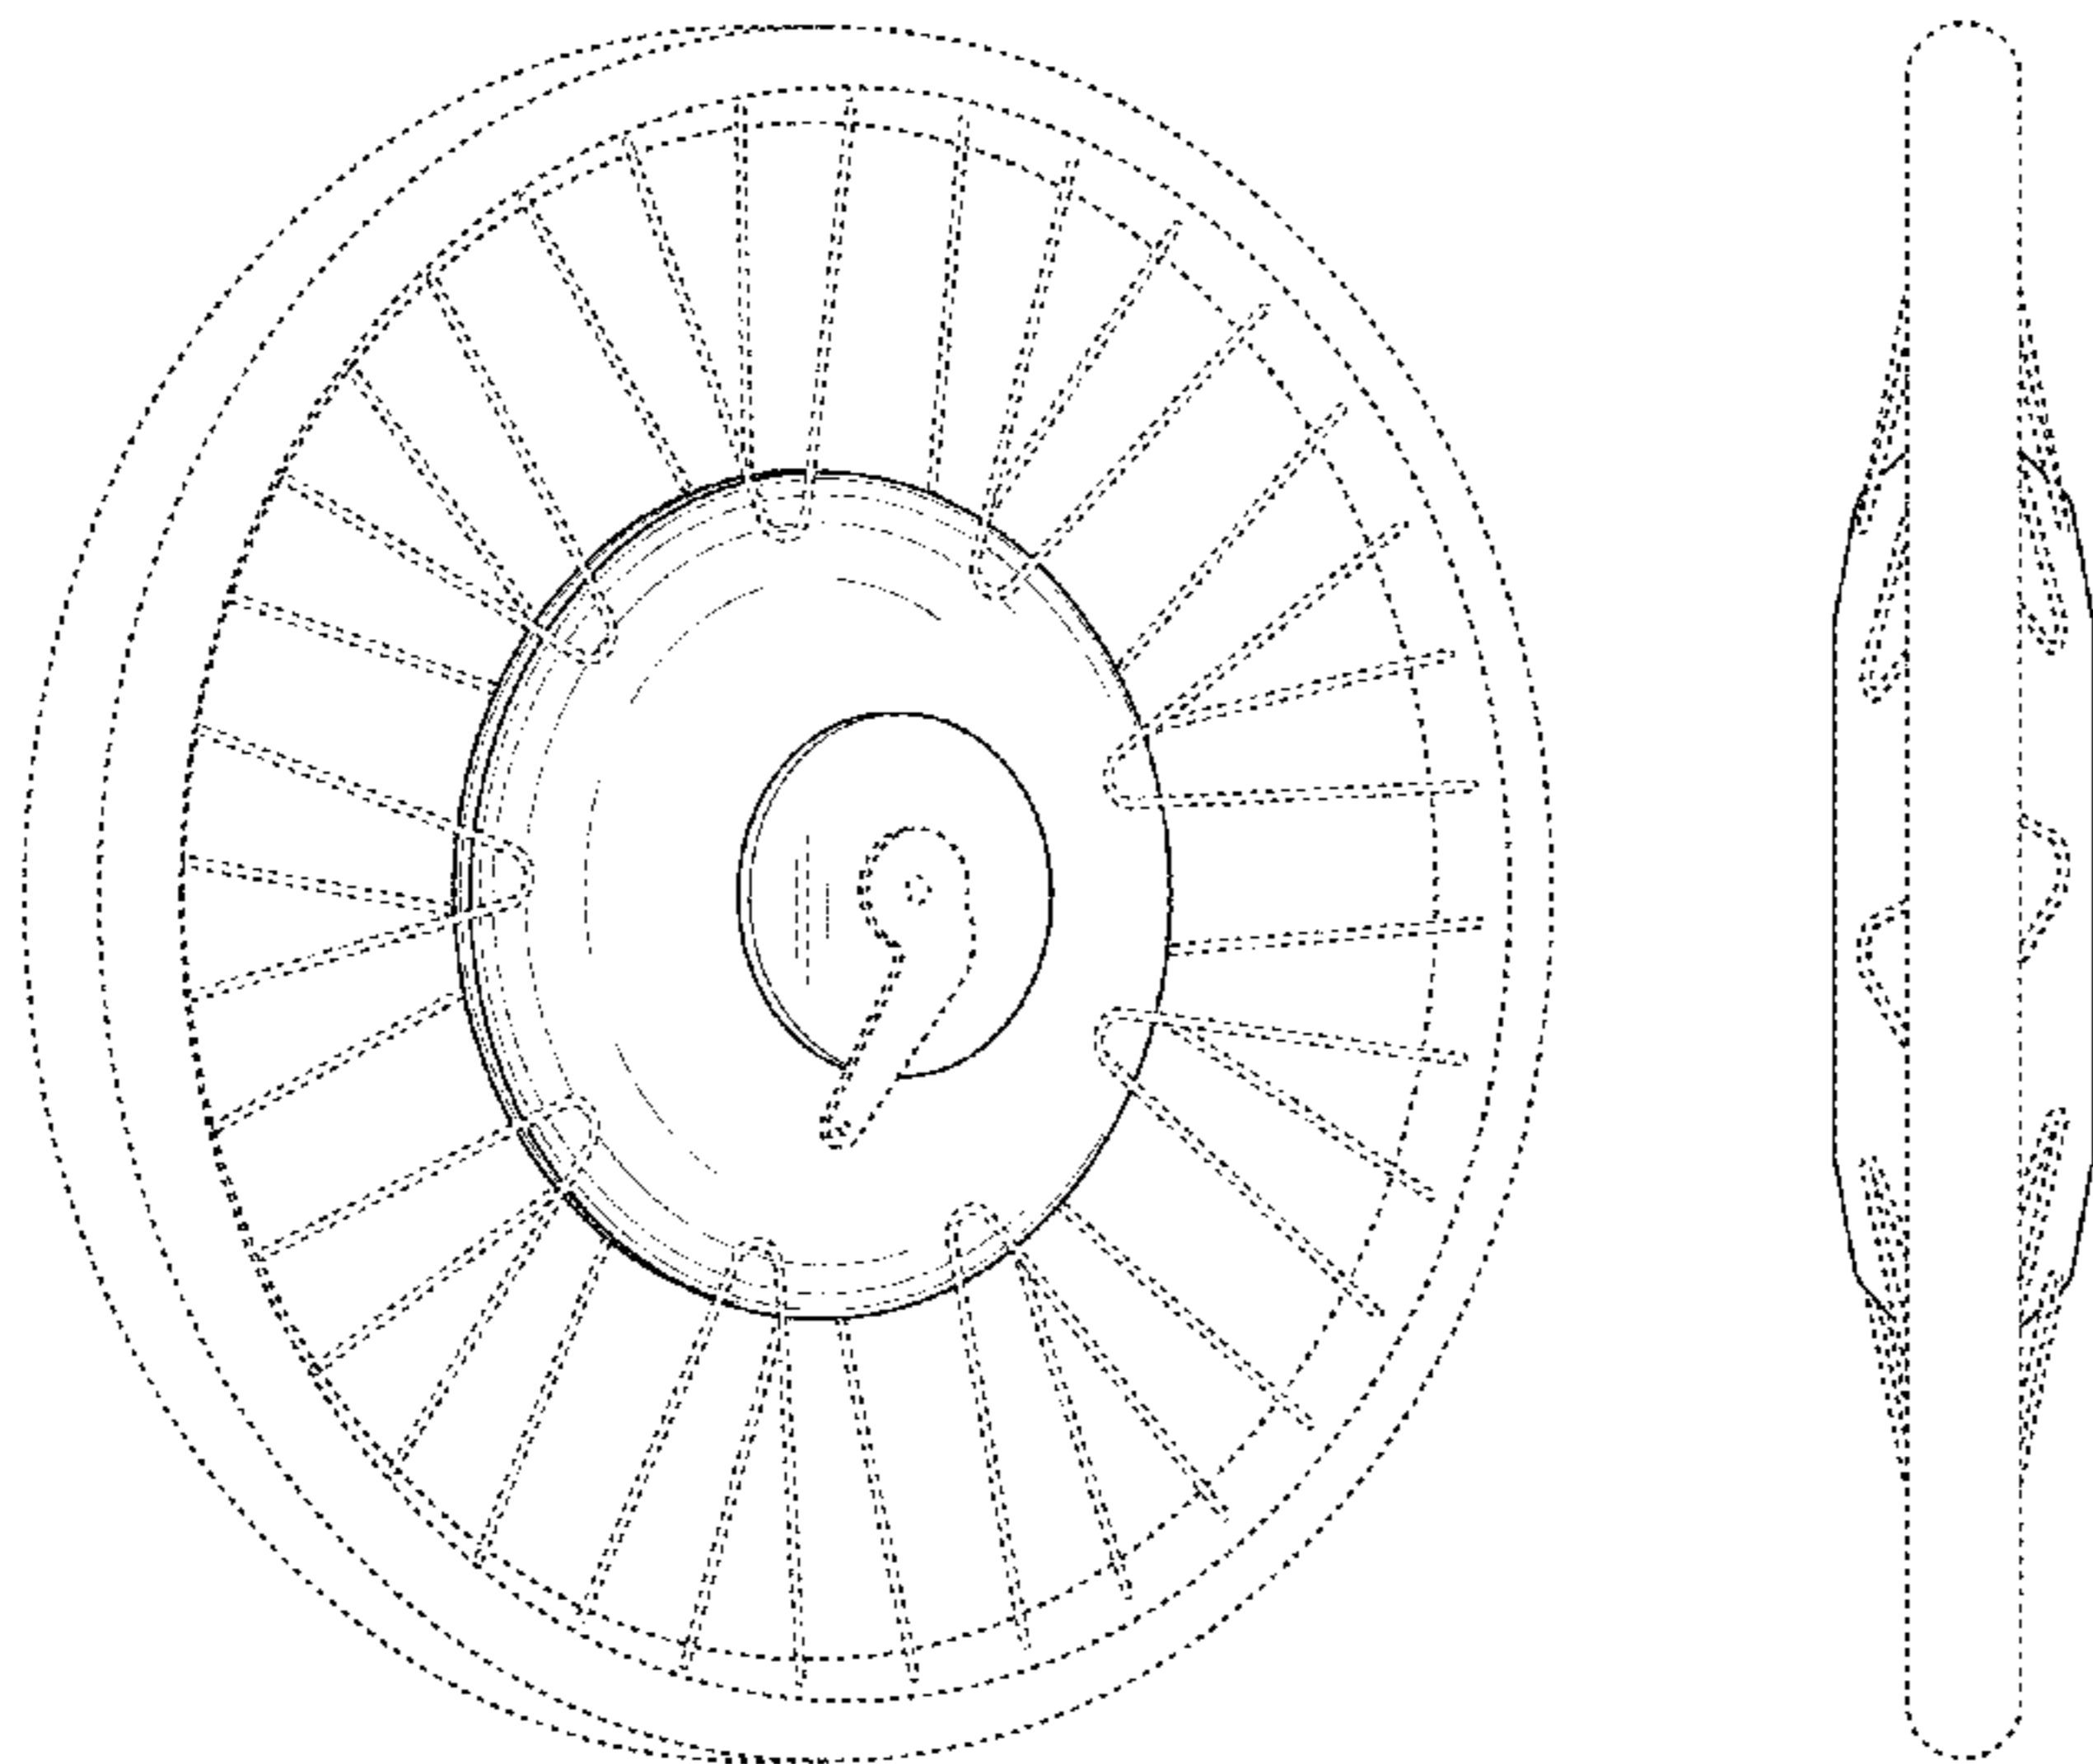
is a perspective view of the right, non drive side of the hub for motorized wheel hub; and
